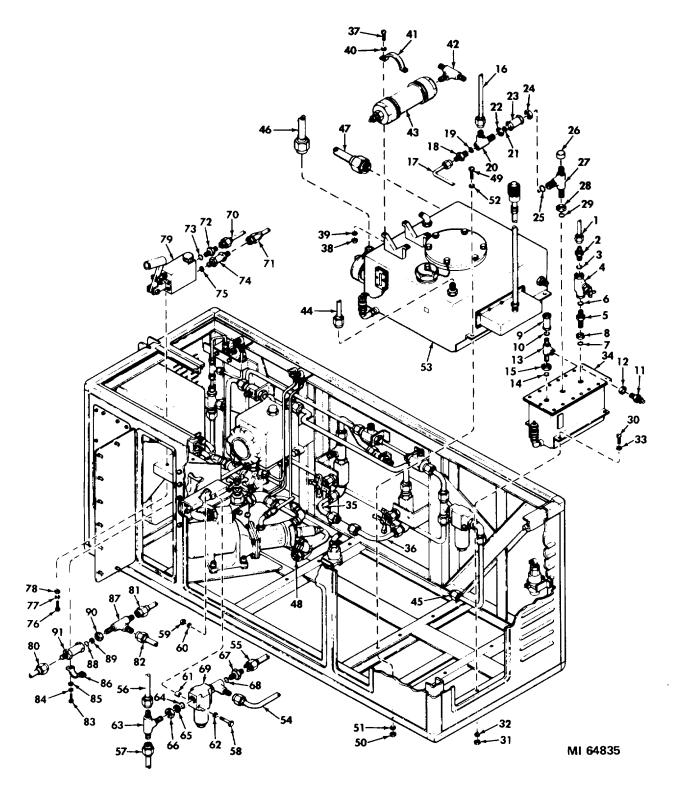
Components of the hydraulic test console lower section-partial exploded view (part II).
